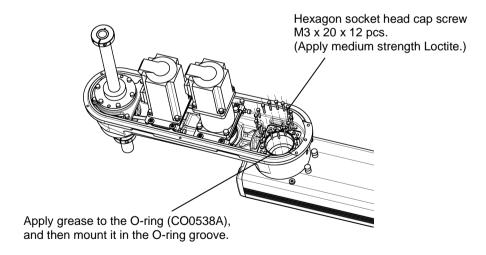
Mounting arm 2 (KHL-500, KHL-600, KHL-700)
